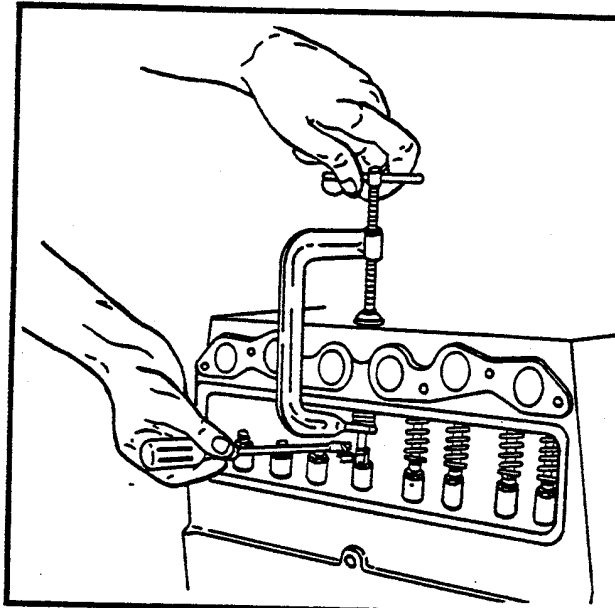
INSTALLING VALVES WITH COMPRESSOR
